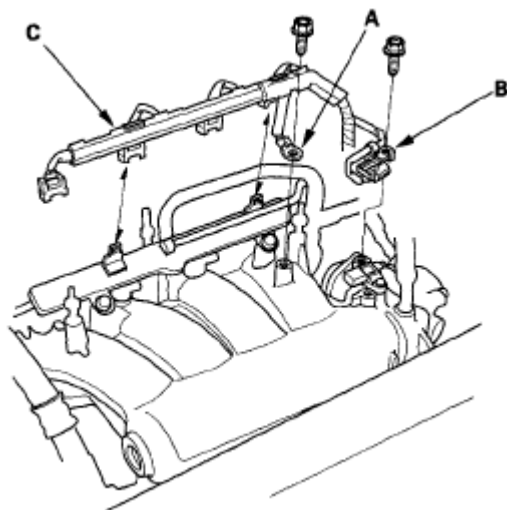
Identifying Ground Cable, Harness Clamp Bracket And Harness Holder
